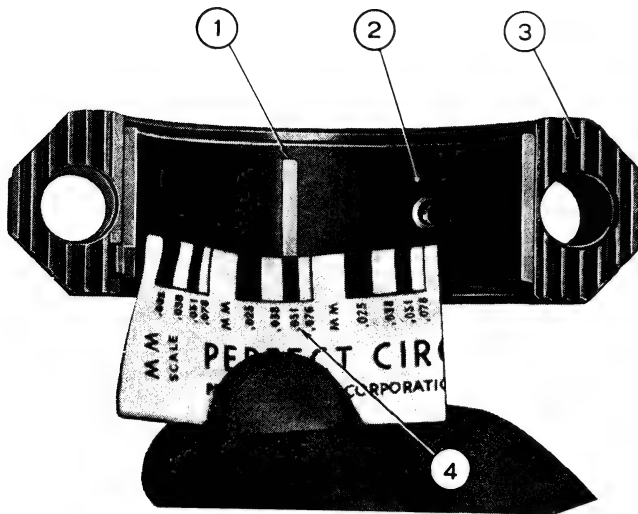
Comparing the width of the flattened « Plastigage » with the envelope graduation scale to check connecting rod bearing shell-to-journal clearance.
